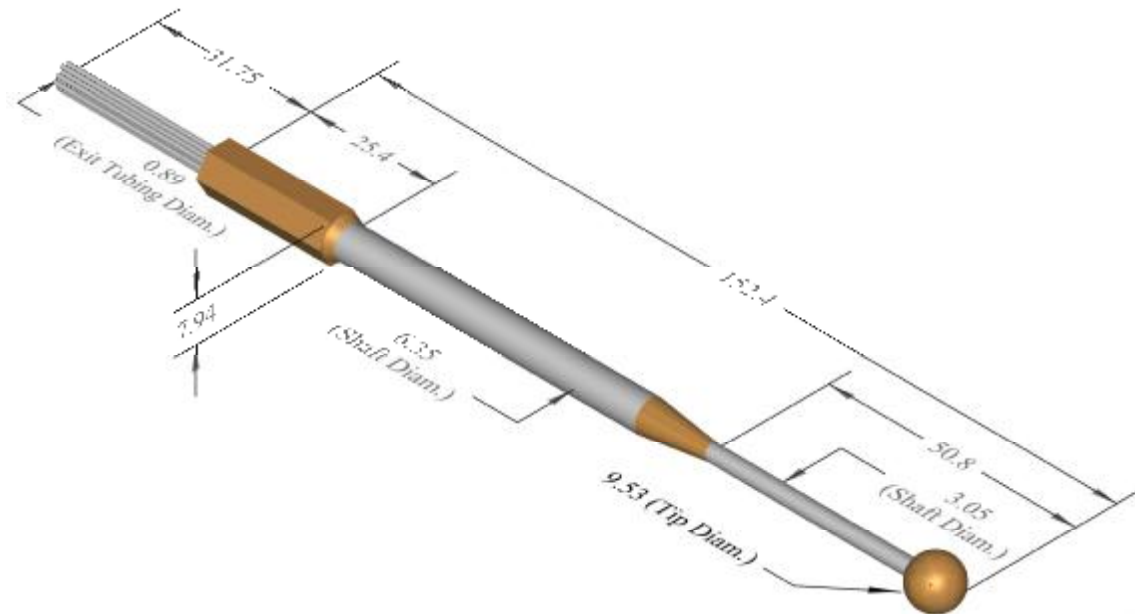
(a): Standard Straight Omniprobe. All Dimensions in Millimeters.
